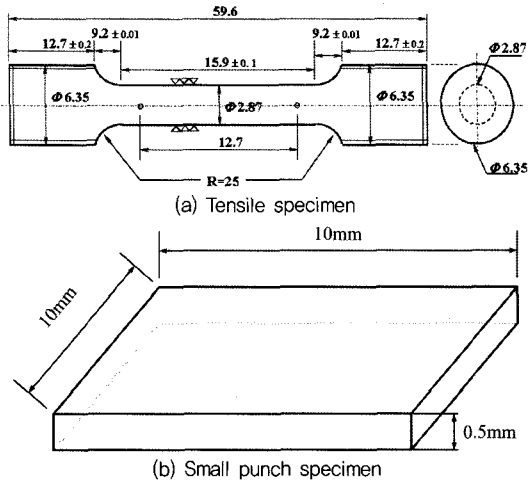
Dimension of specimens used in tensile test and small punch test.
